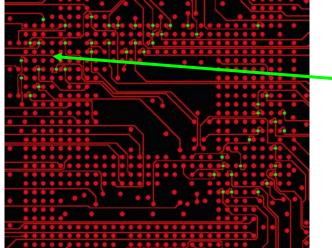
Offset BGA Mounting on a Multilayer Board. 1.25 mm 352 pin BGA
